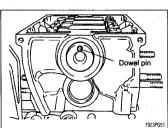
Positioning of the camshaft dowel pin—Mirage 1.5L (4G15) engine
